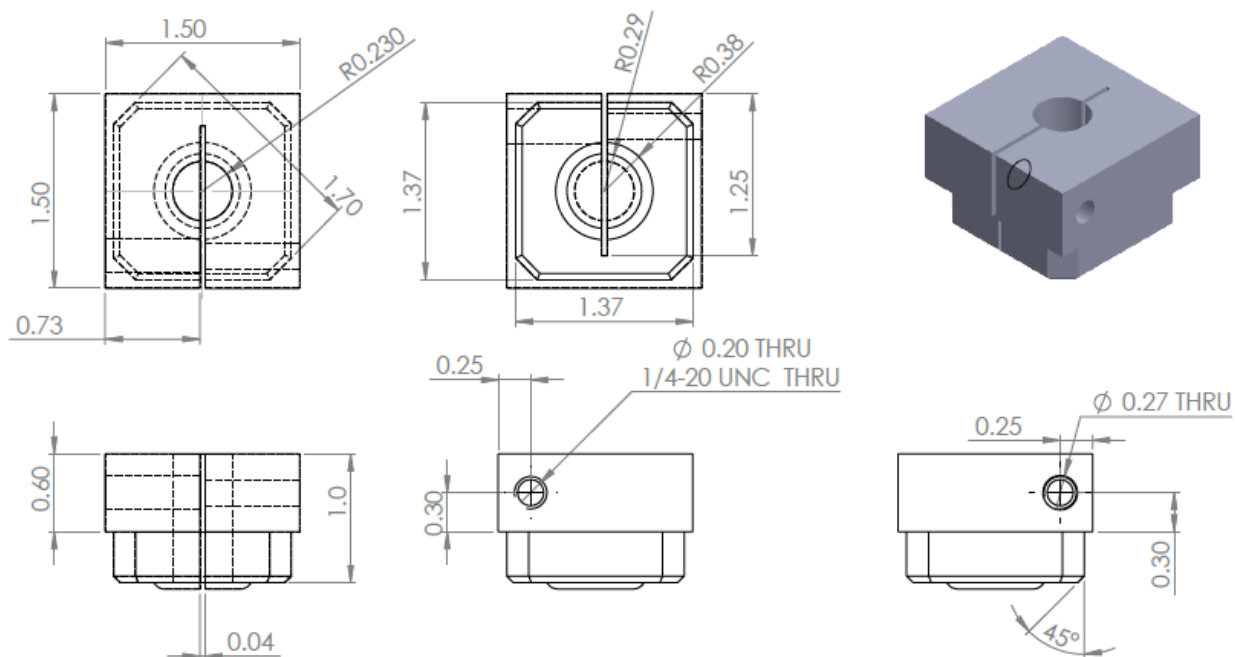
Geometry details of the Zr-4 clad SNTT specimen.
